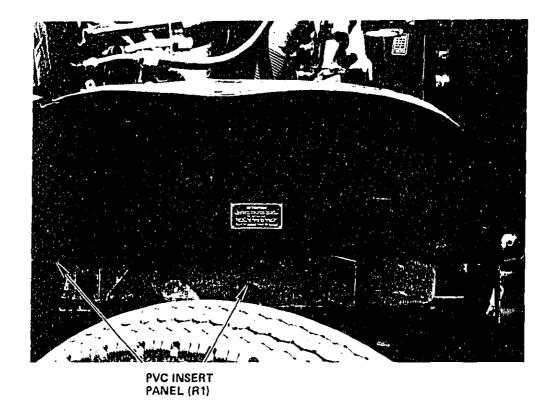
PVC PANEL RIVETED TO INNER FENDER.
